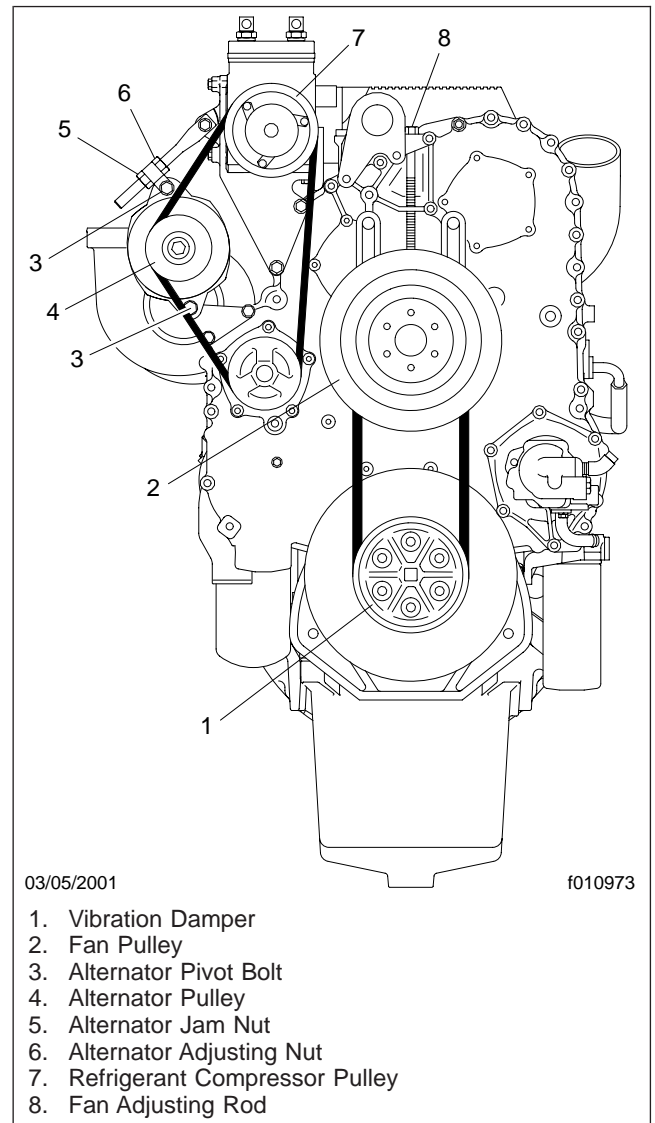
, Drive Belts Without an Automatic Belt Tensioner
